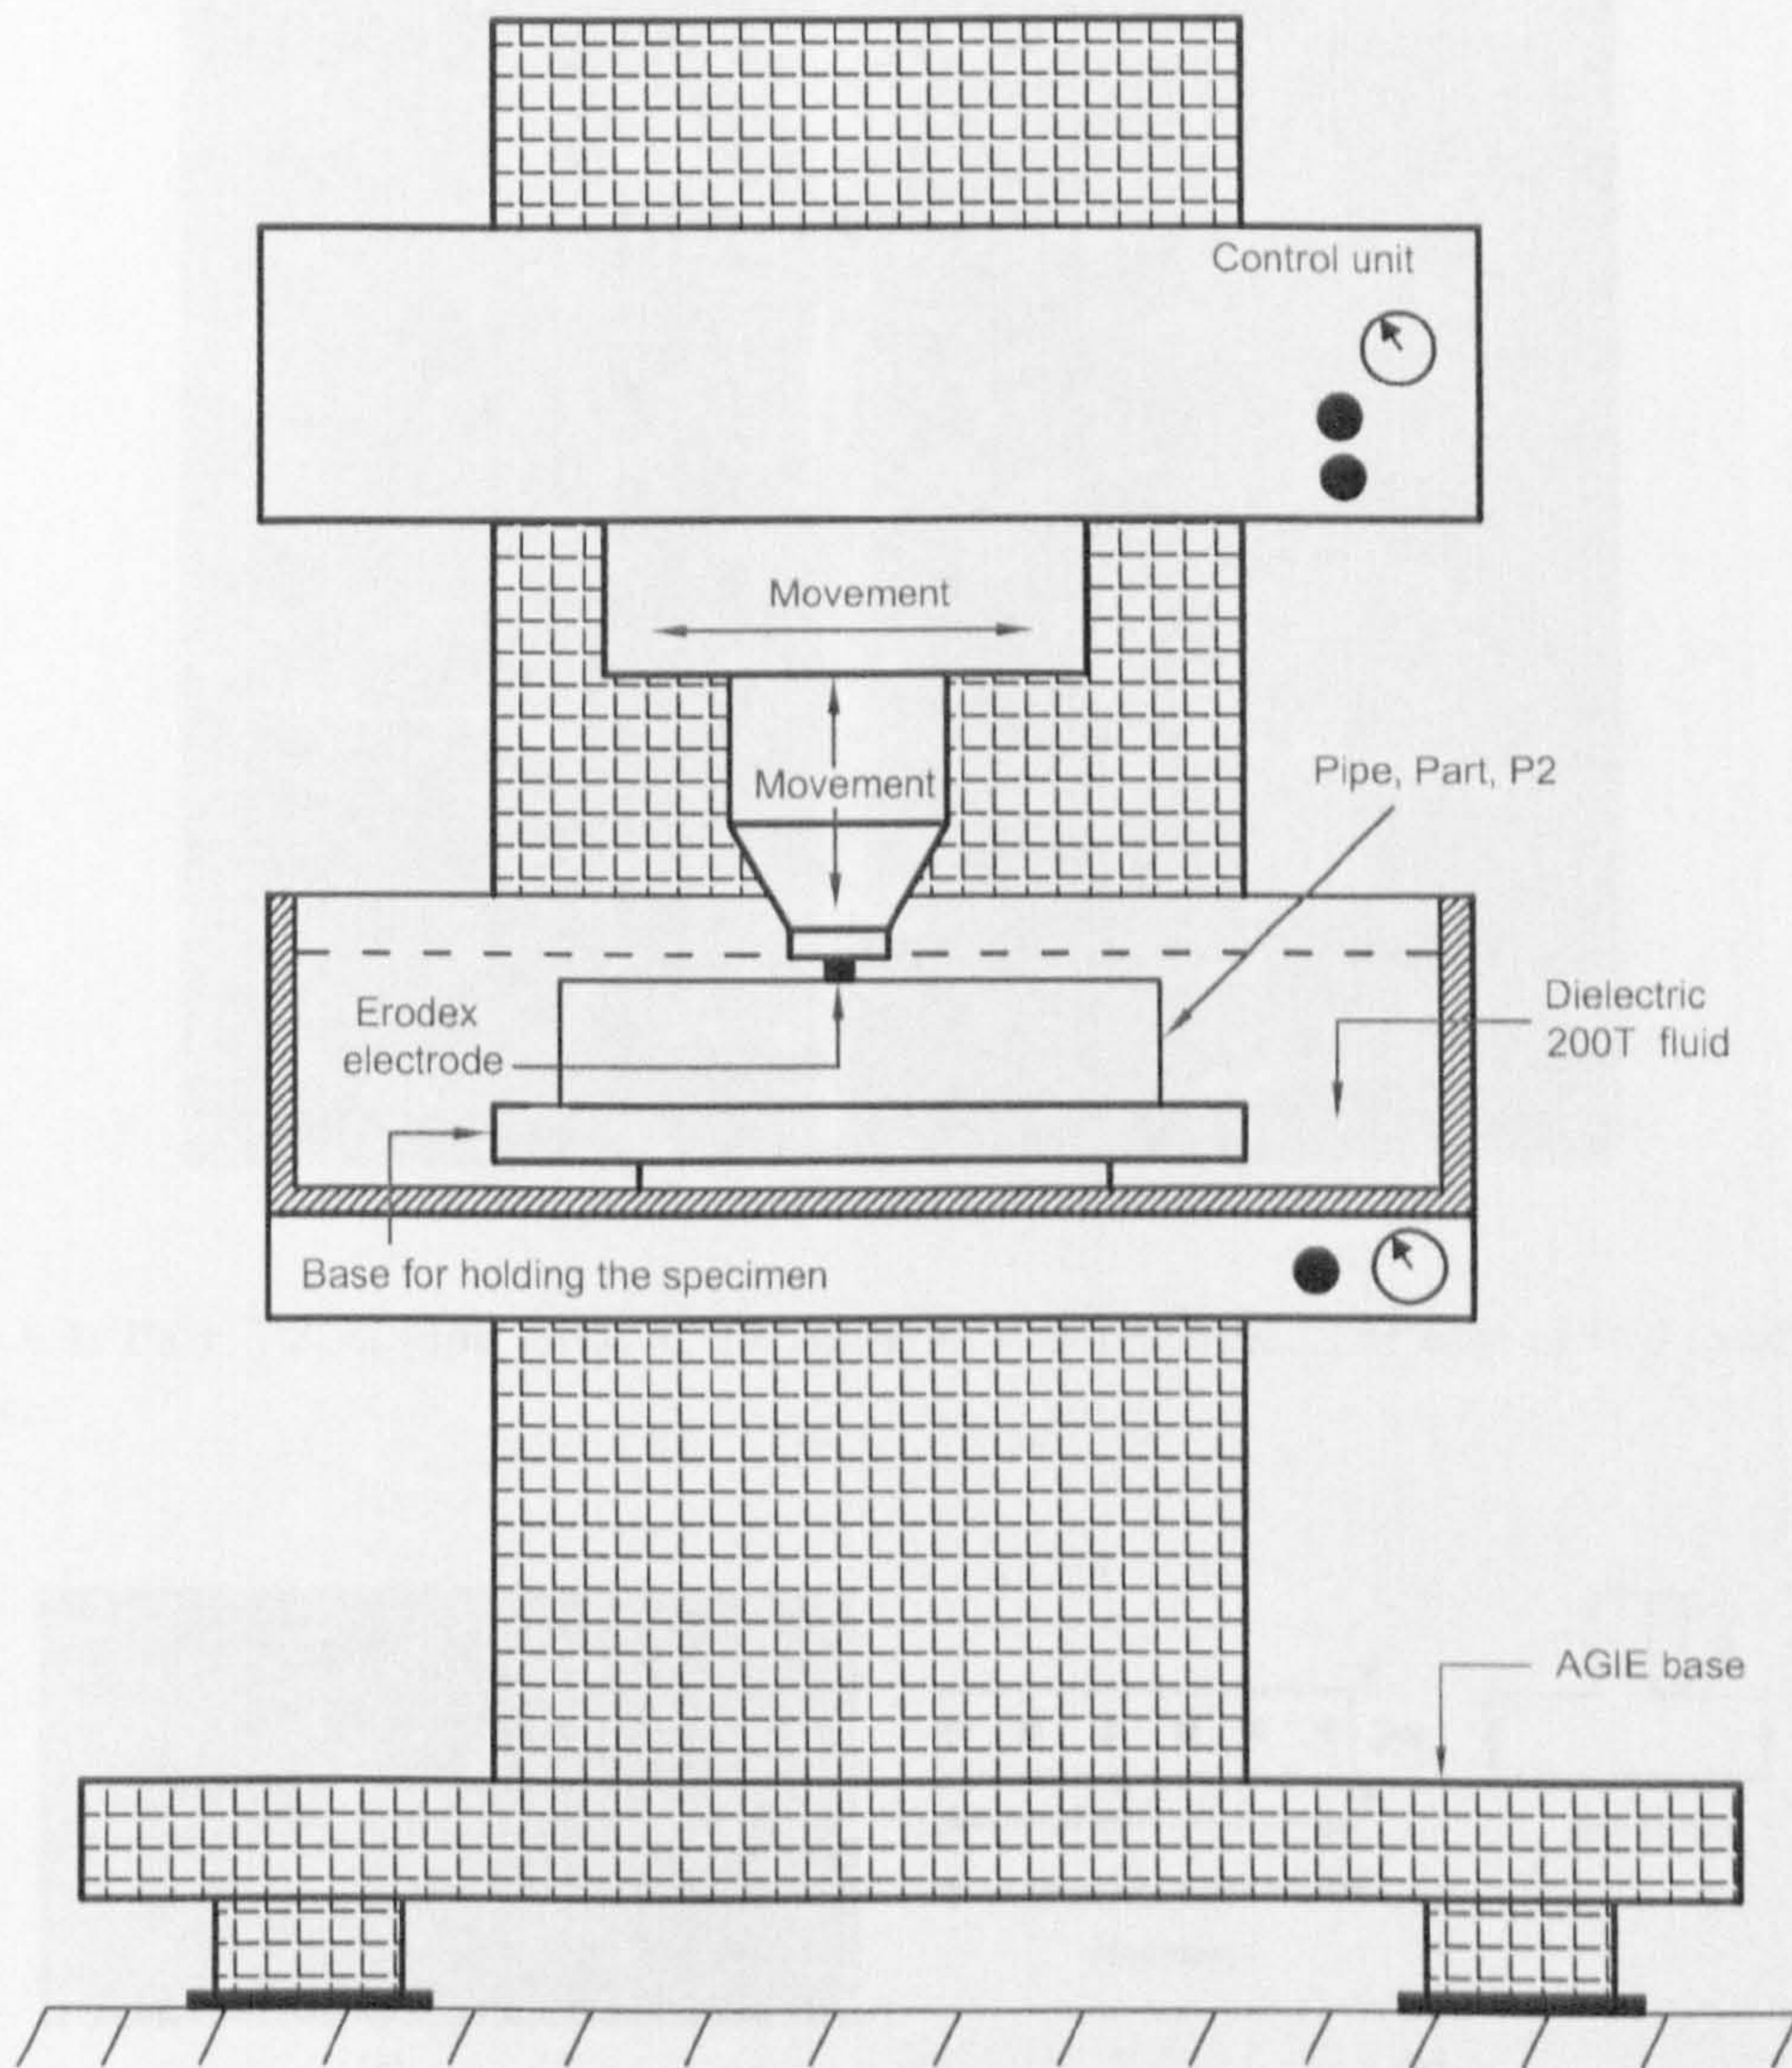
Sketch of the electrical discharge machine used for manufacturing of axial gouges.
